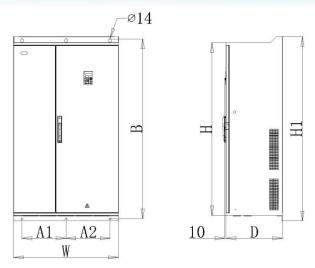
Schematic of  $450W{\sim}710kW$  External Dimensions and Mounting Dimensions
